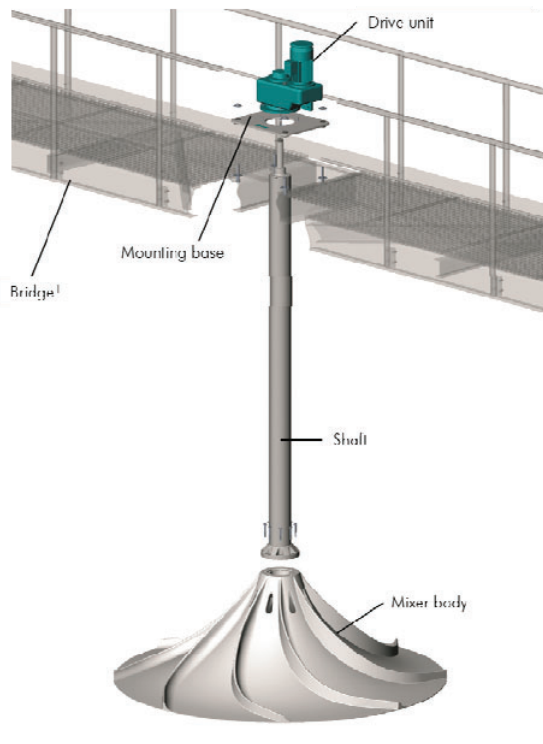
Exploded view on a Hyperboloid Mixer with top mounted drive
